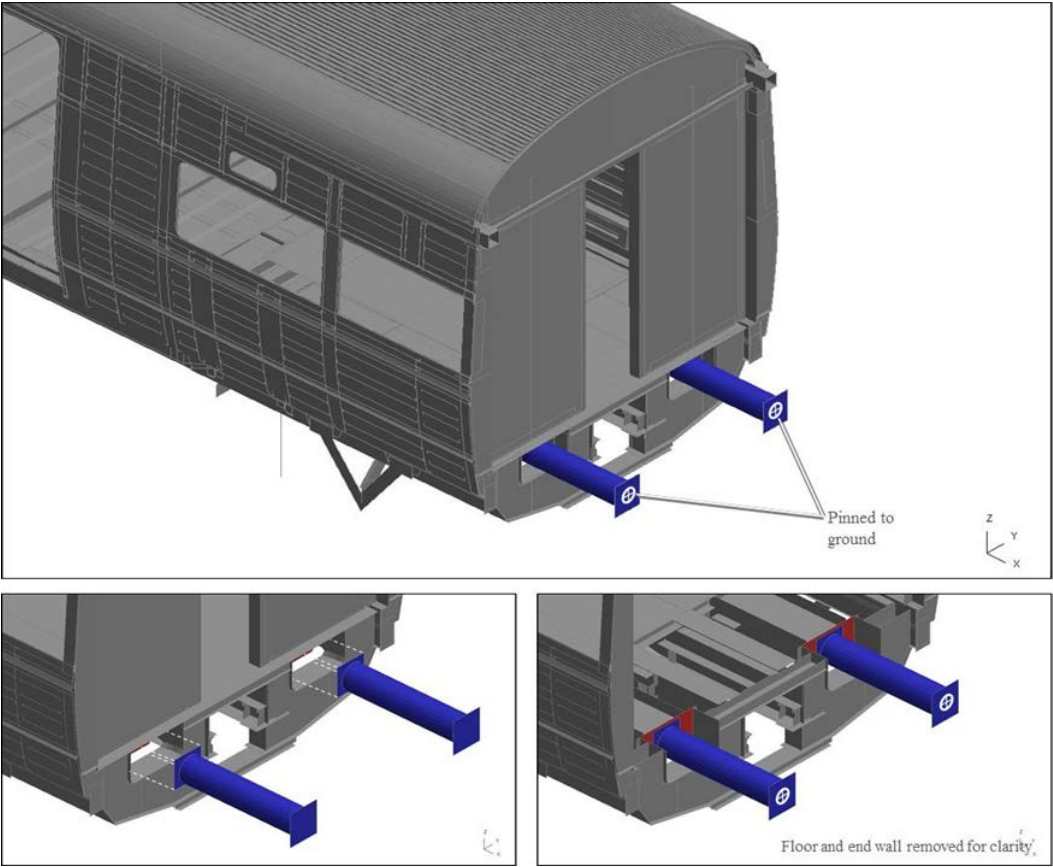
Loading Bars (blue) and Contact to Lower CEM Pockets (red) at the Fixed End for the 800,000-pound Load Test
